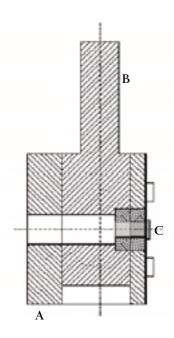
Specimen (C) fitted through mechanical device (A and B). Cross section view.
